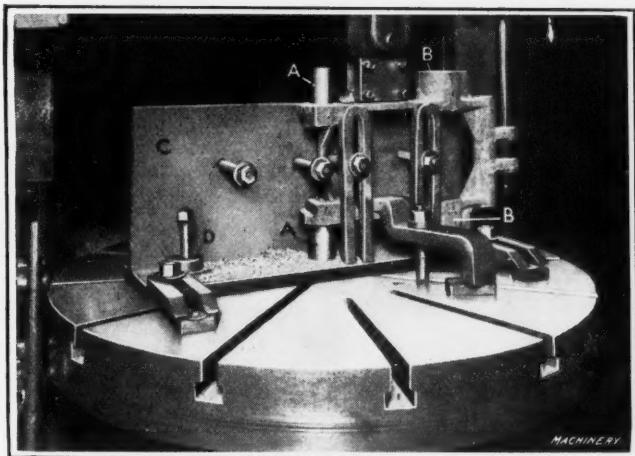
Vertical Boring Machine and Fixture for holding Reverse Yoke of Baker Valve Gear while boring and turning
